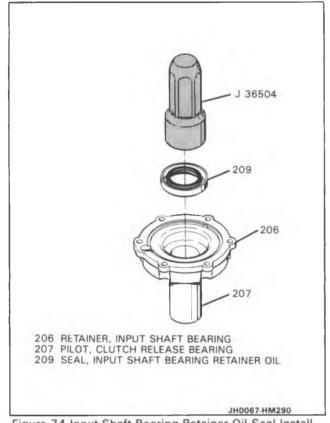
Input Shaft Bearing Retainer Oil Seal Install
